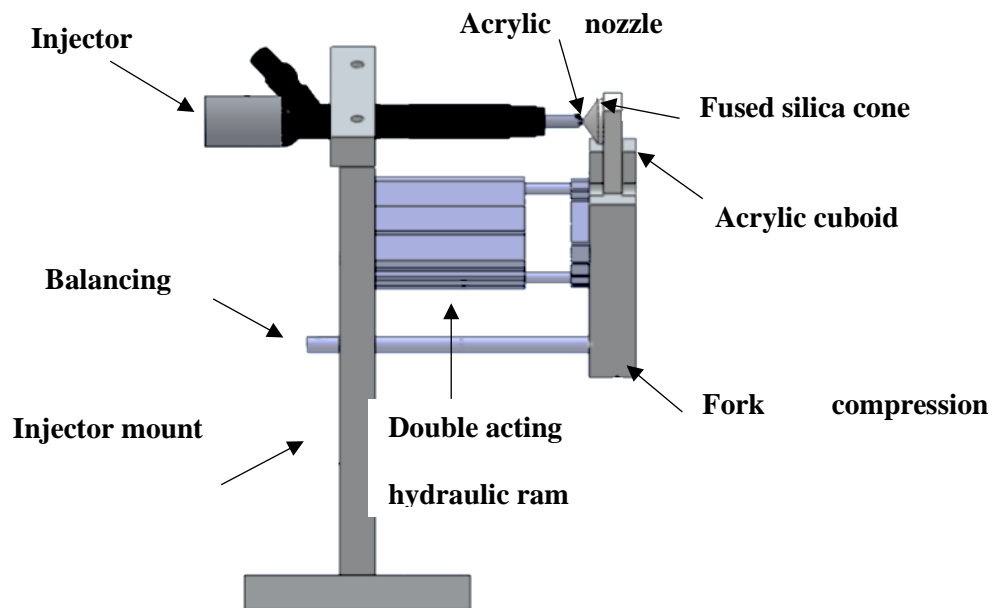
Assembly of fuel injection components<sup>16</sup>.
